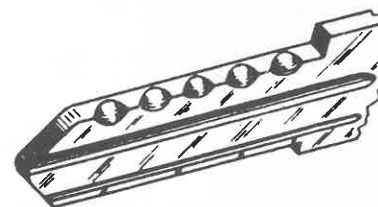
Filing Blank for Wafer Tumbler Impressions
